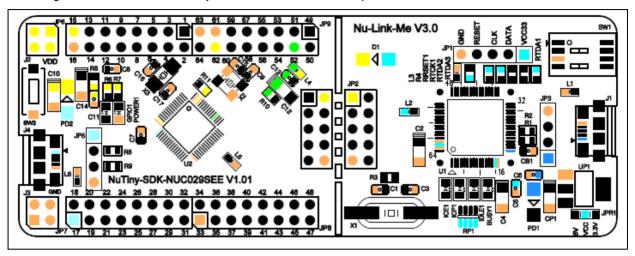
NuTiny-SDK-NUC029SEE PCB Placement
